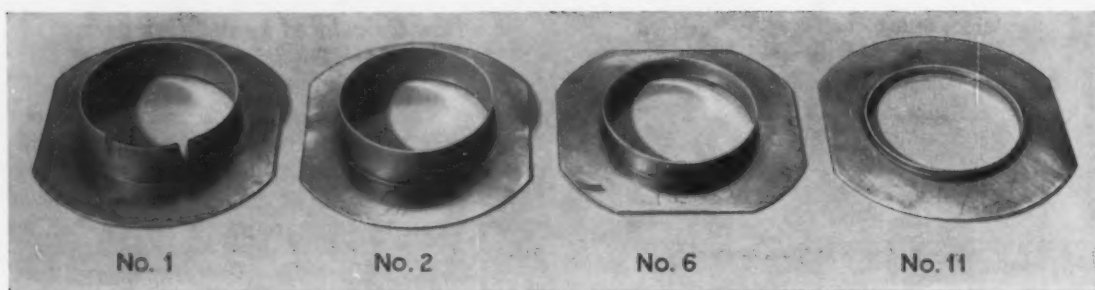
Four of the test parts used in the compilation of Table 1. It will be noted that when the initial hole diameter was 5/8 inch (Test 1), considerable fracture occurred.
